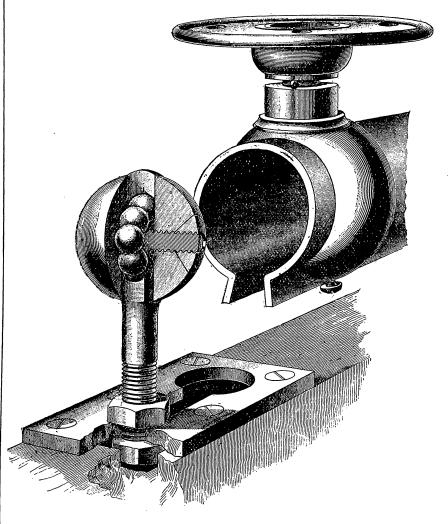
The McCabe Ball Bearing Tubular Door Hanger.
